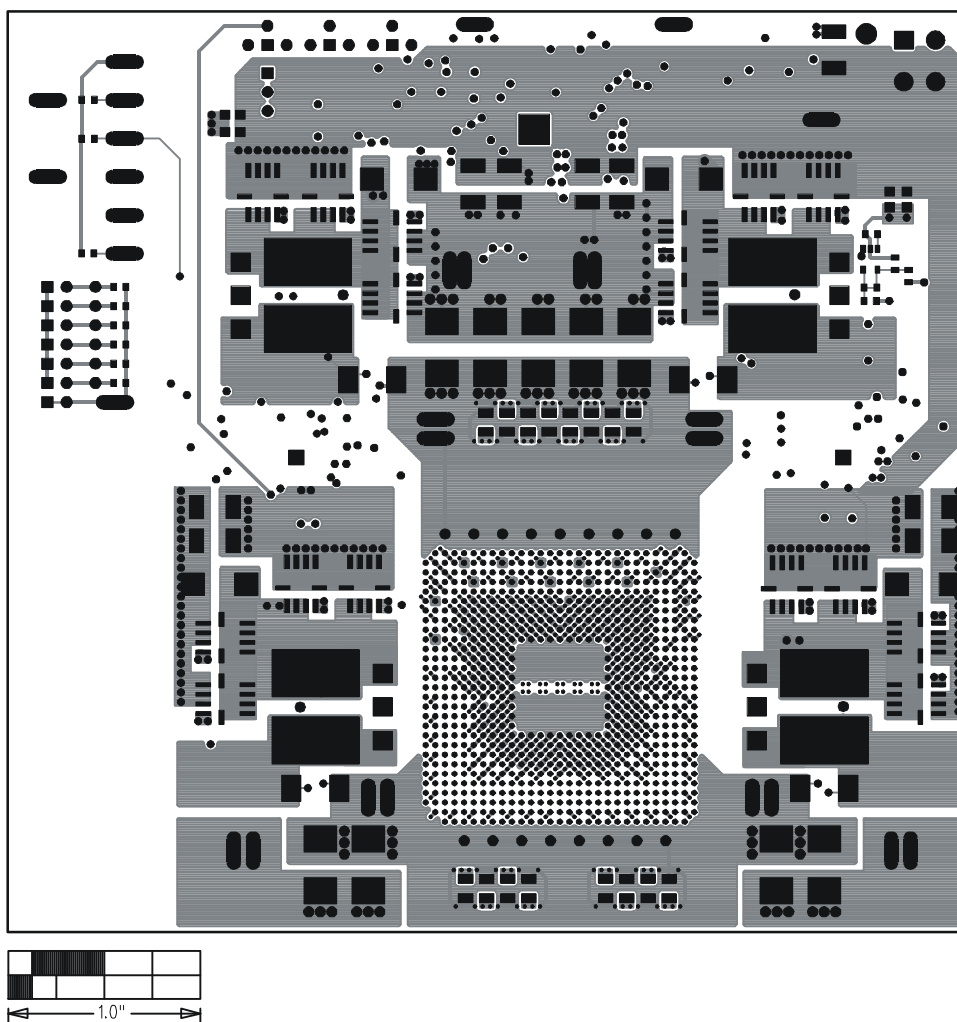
MAX1544/MAX1545 EV Kit PC Board Layout – Top Side
